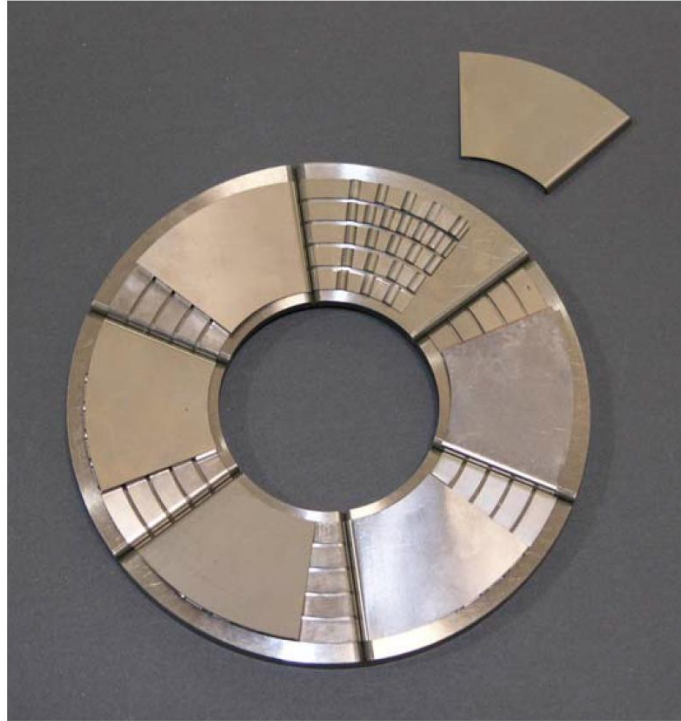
Prototype bearing with one top foil removed (Fig. 11 of Dykas et al. [2008a]).
